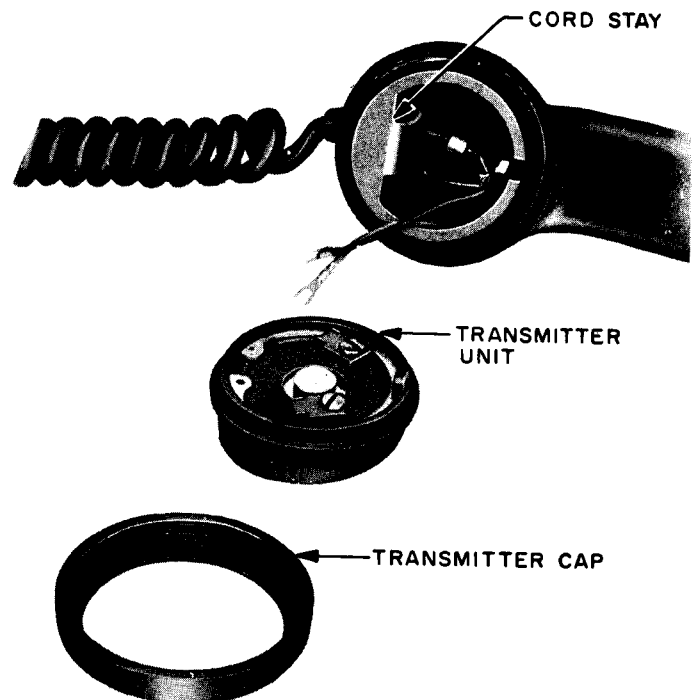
Assembly of KS-16664, List 1 Transmitter
